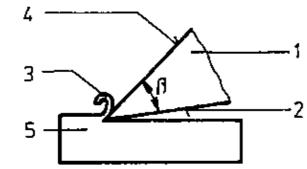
Cutting-wedge angle "?" at the cutting tool
